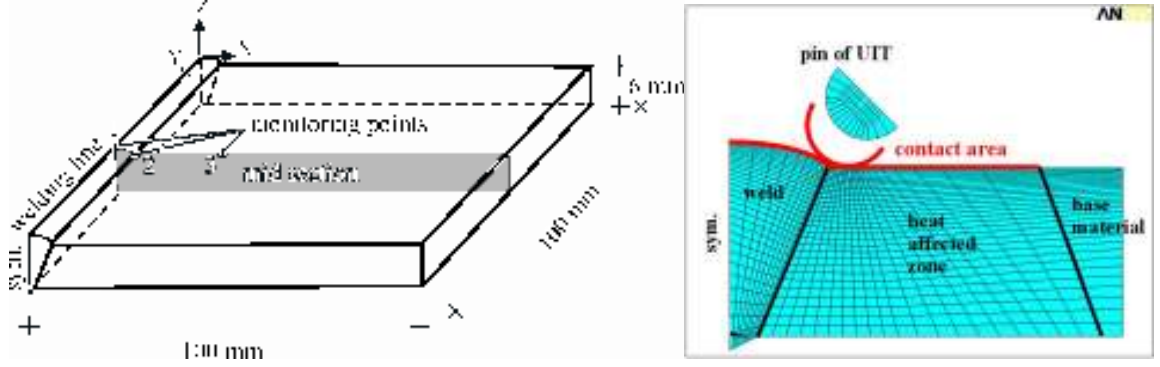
Geometry and FE-model of a steel-plate with a single butt weld.
